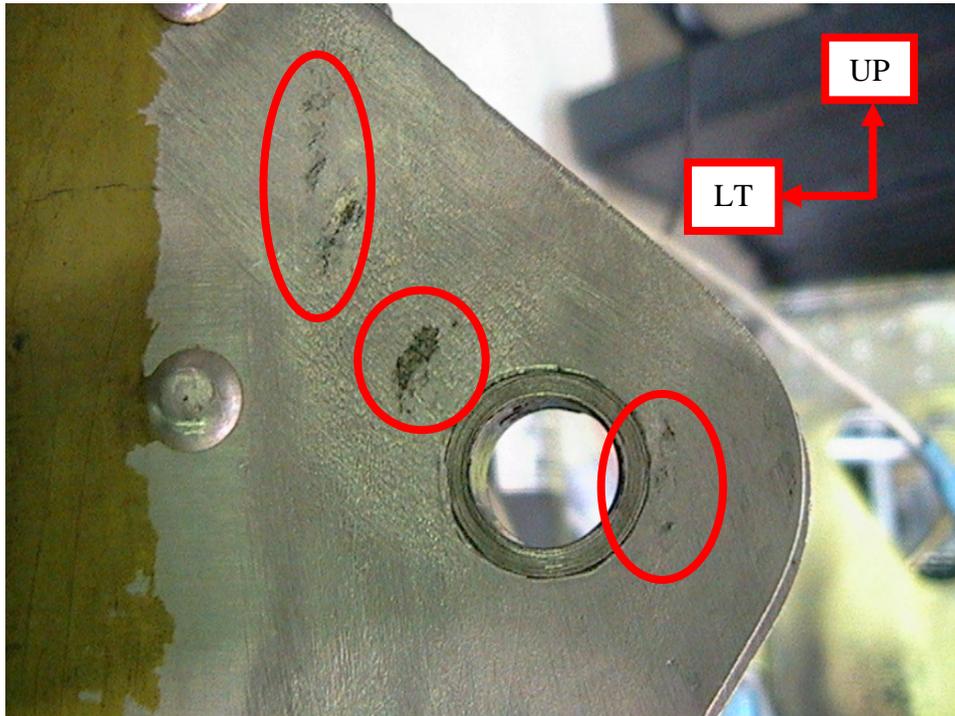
Corrosion on the Right Wing Front Spar Wing Side Attachment Point WS 30
